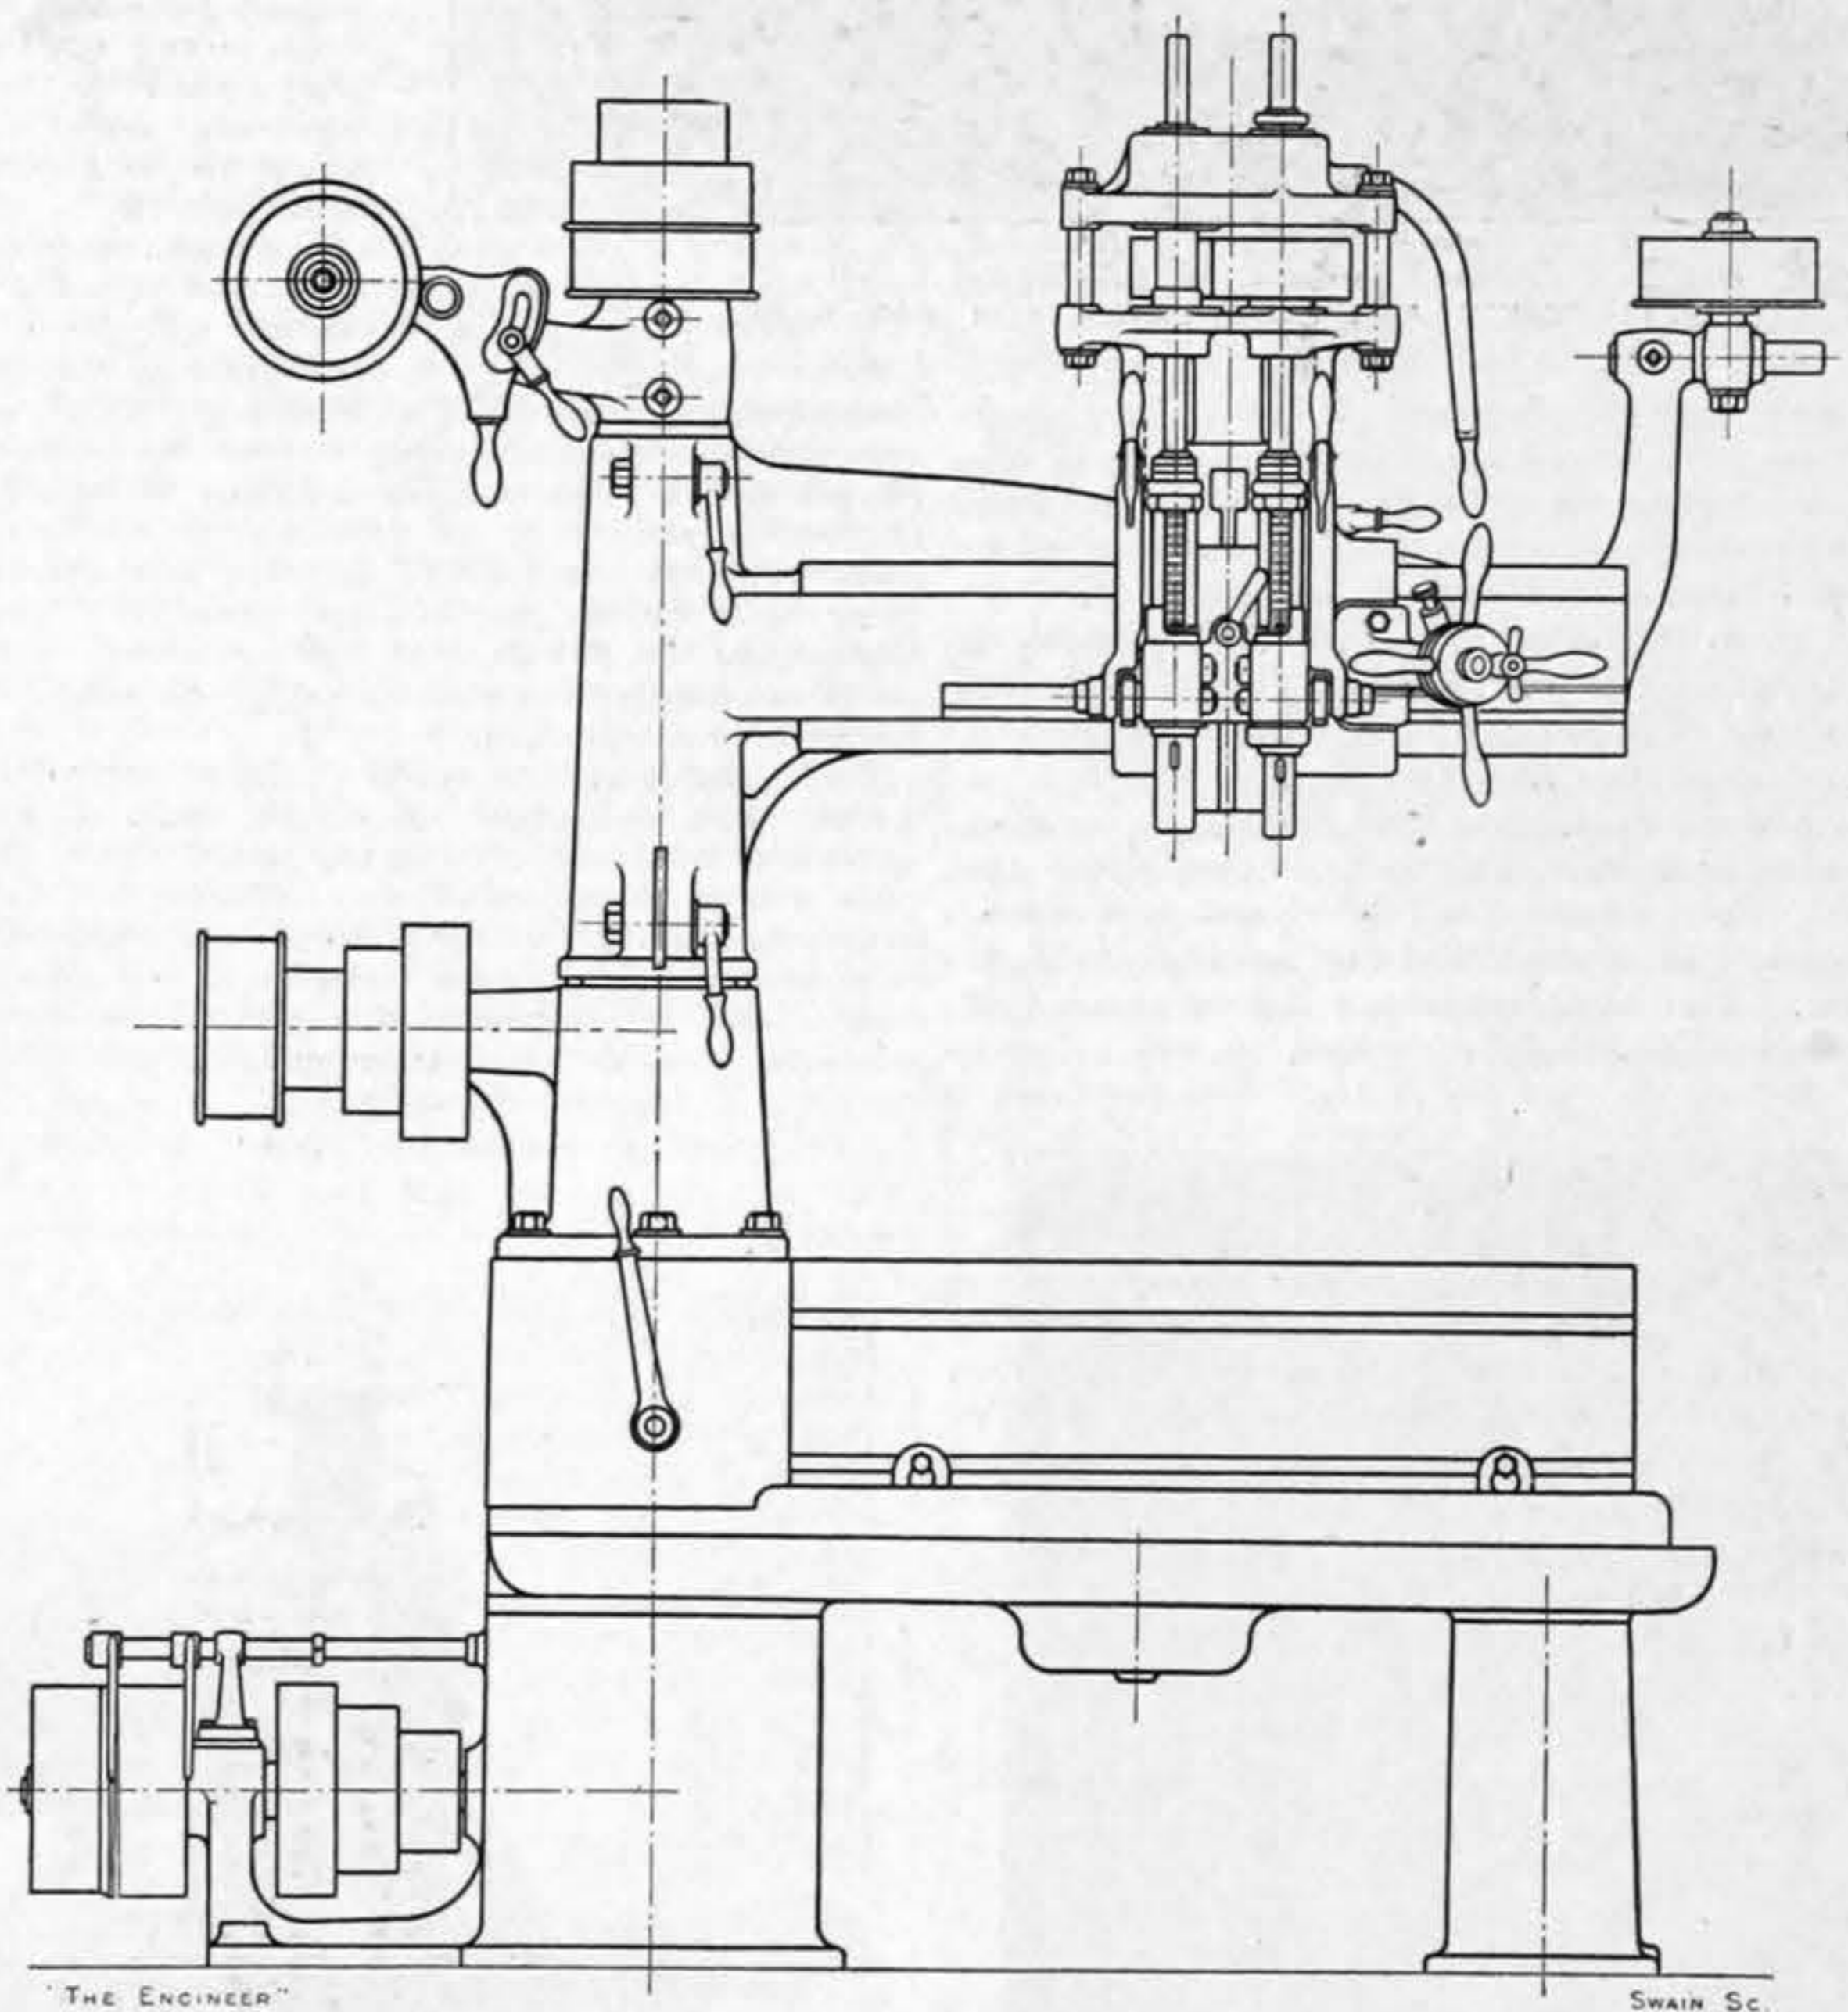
SELSON ENGINEERING CO.'S SENSITIVE RADIAL DRILLING MACHINE
